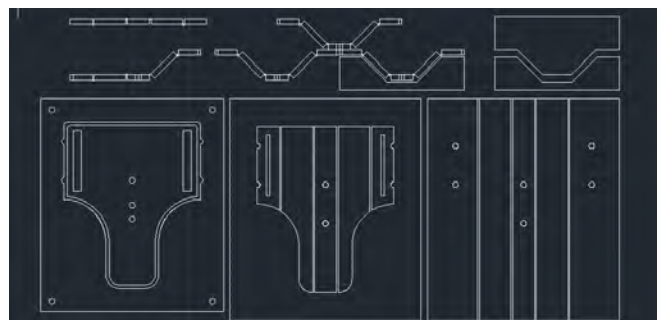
Muqarna press mould CAD drawing, © 2014, Hursty. This design featured a broader spade-like design that allows for compression into an angled base mold.
